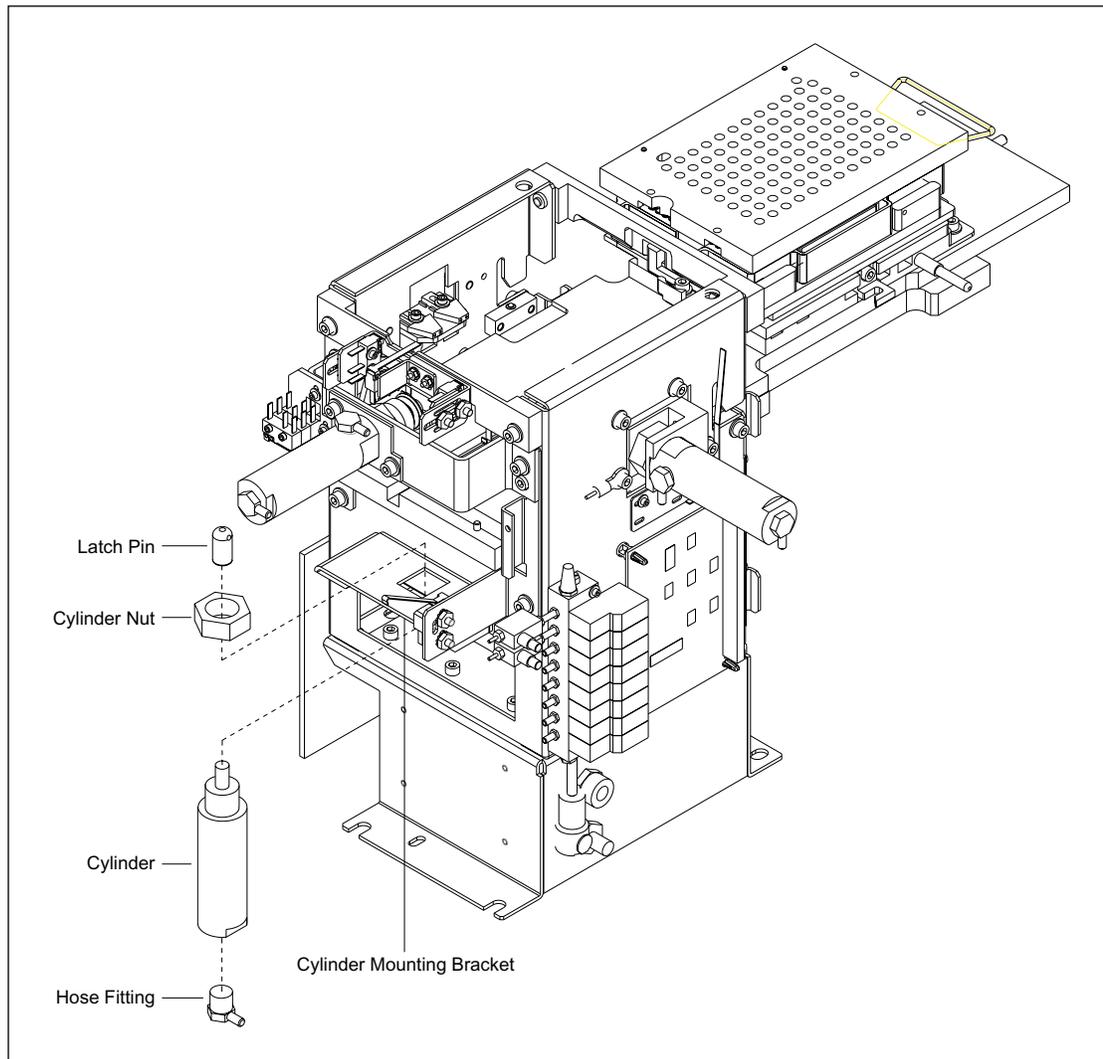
Slide Assembly Lock Actuator Mounting (MB 2000).
